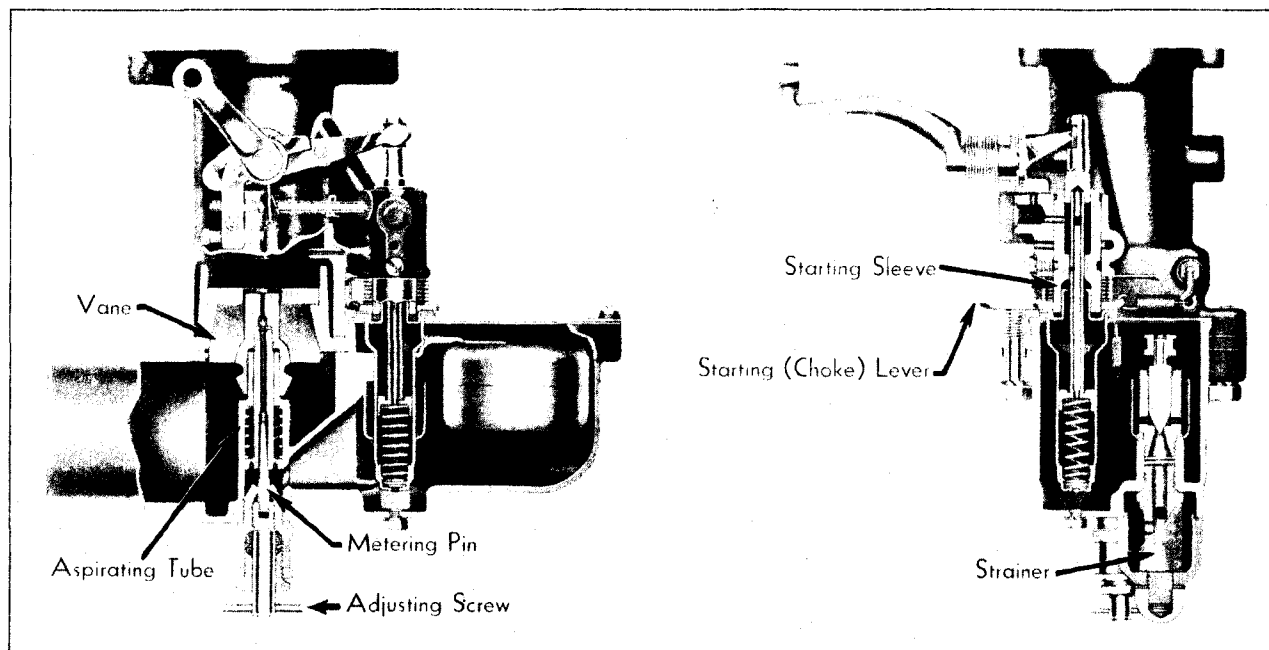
Cut-away views of the 370-B and 452-B carburetor
